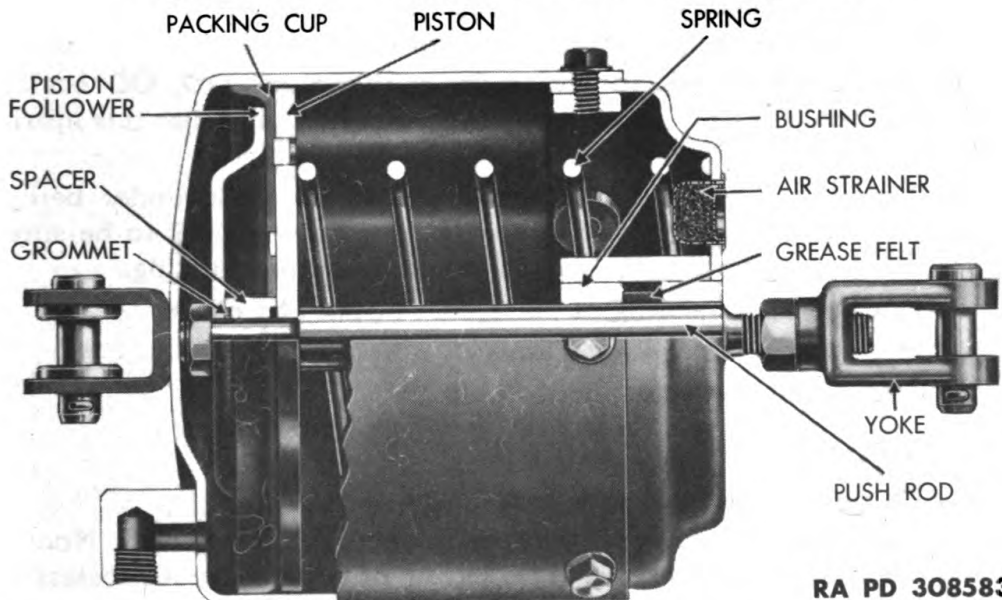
Sectional View of a 6-inch x 3-inch Brake Cylinder
